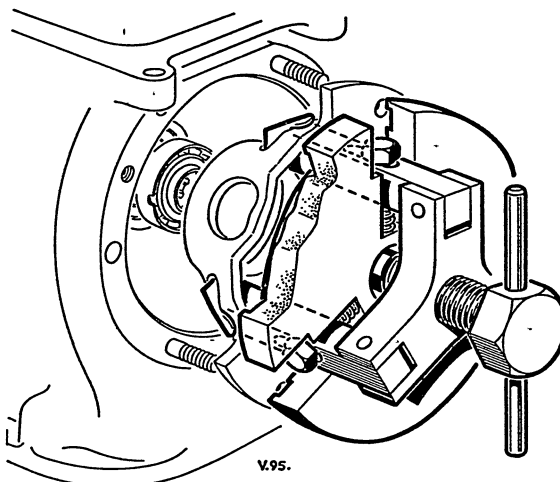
Extracting the overspeed governor drive housing (Mk. 2)
